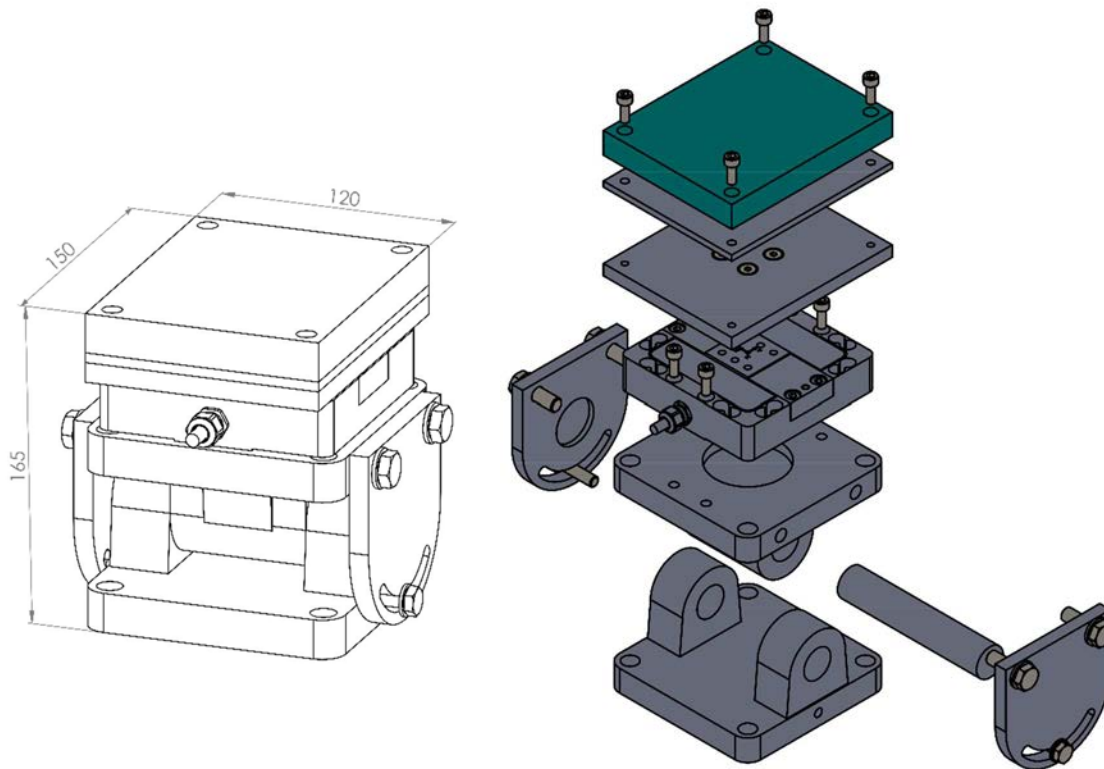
| System of ground inclination adjustment, dimensions and exploded view.
